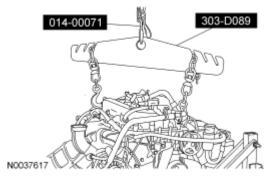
Identifying Special Tools (014-00071, 303-D089) Courtesy of FORD MOTOR CO.
